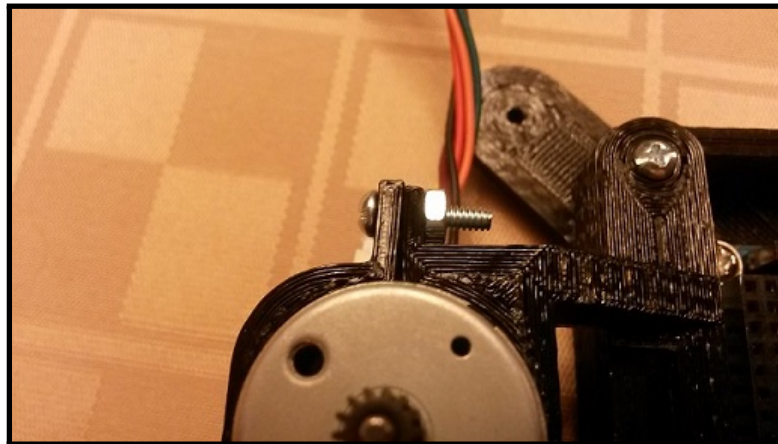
Motor Placed Inside Motor Holder With Clamp Pieces Attached
